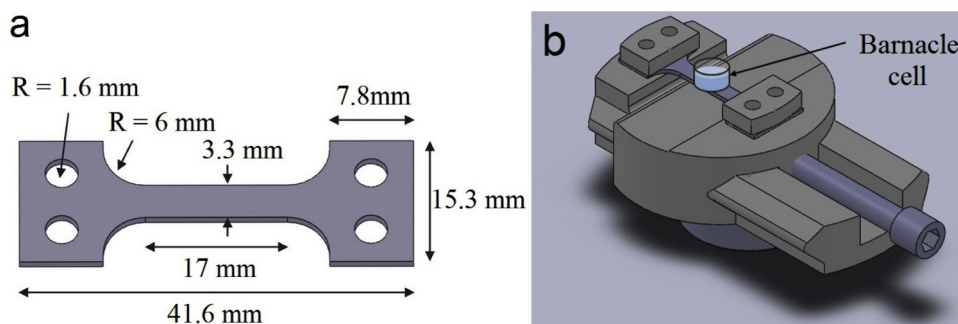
a) Tensile test specimen and b) assembly of the barnacle cell on the specimen mounted in the tensile straining device.
